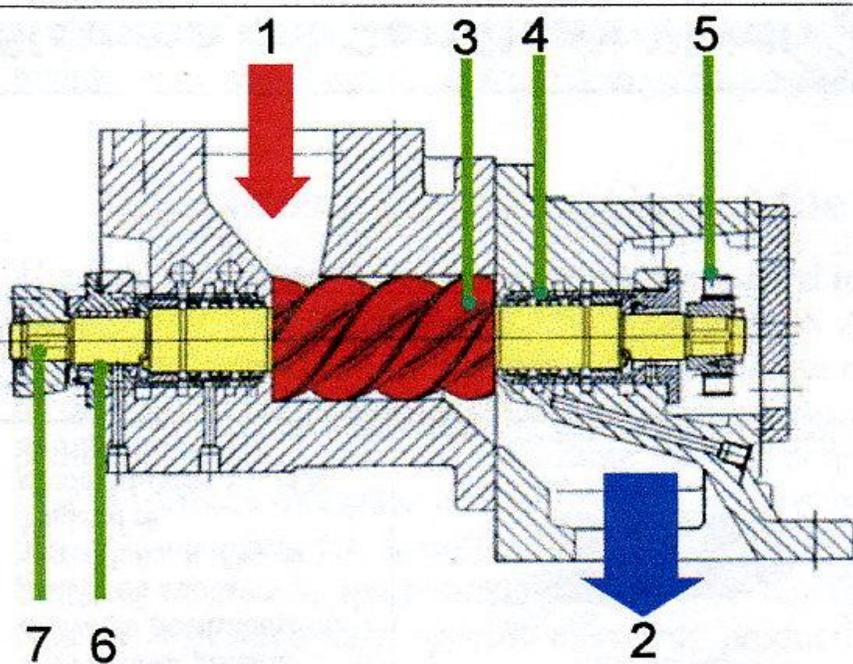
Section drawing of a screw-type engine (1... live steam inlet, 2... exhaust steam outlet, 3... male rotor, 4... shaft seal, 5... synchronisation gearwheels, 6... friction type bearing, 7... output shaft)
